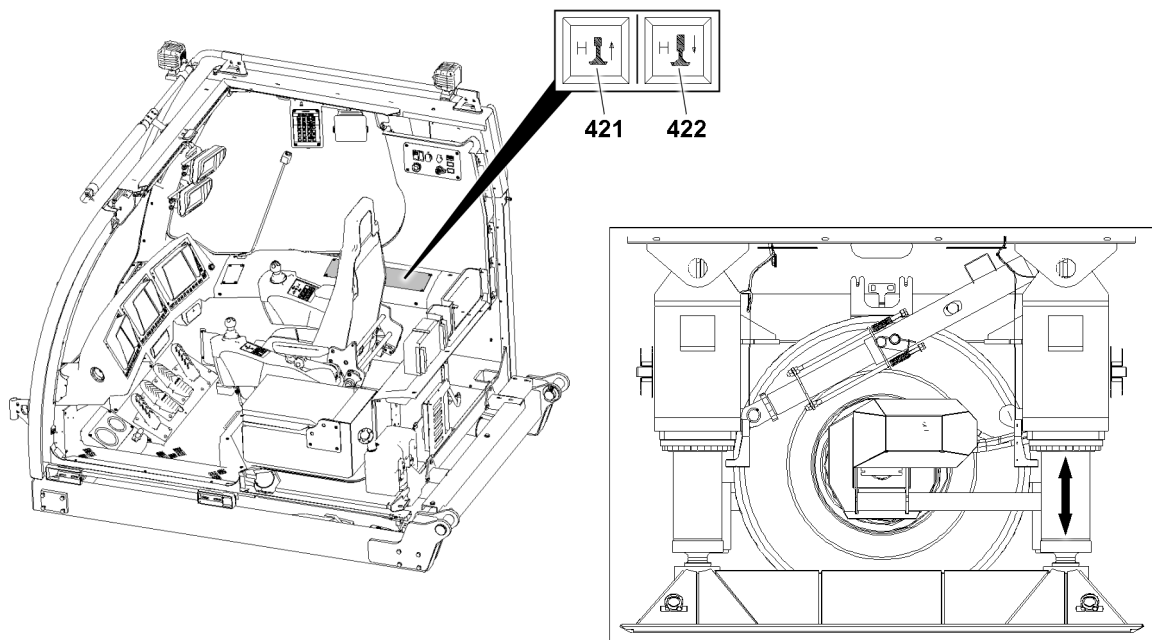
Retracting or extending the support cylinder to the rear using the button on the instrument panel
